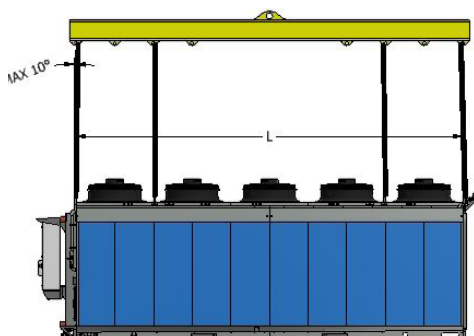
TSDx2-xxx-31.0 Side View (10 Fan)
